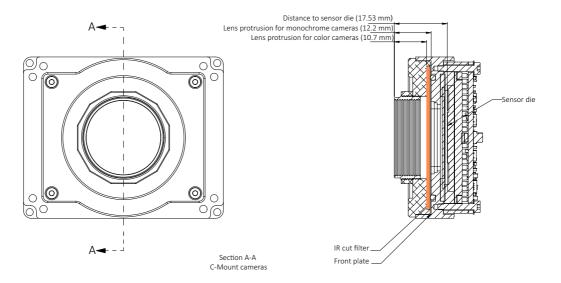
Cross section of Prosilica GT Large Format camera front assembly with C-Mount
